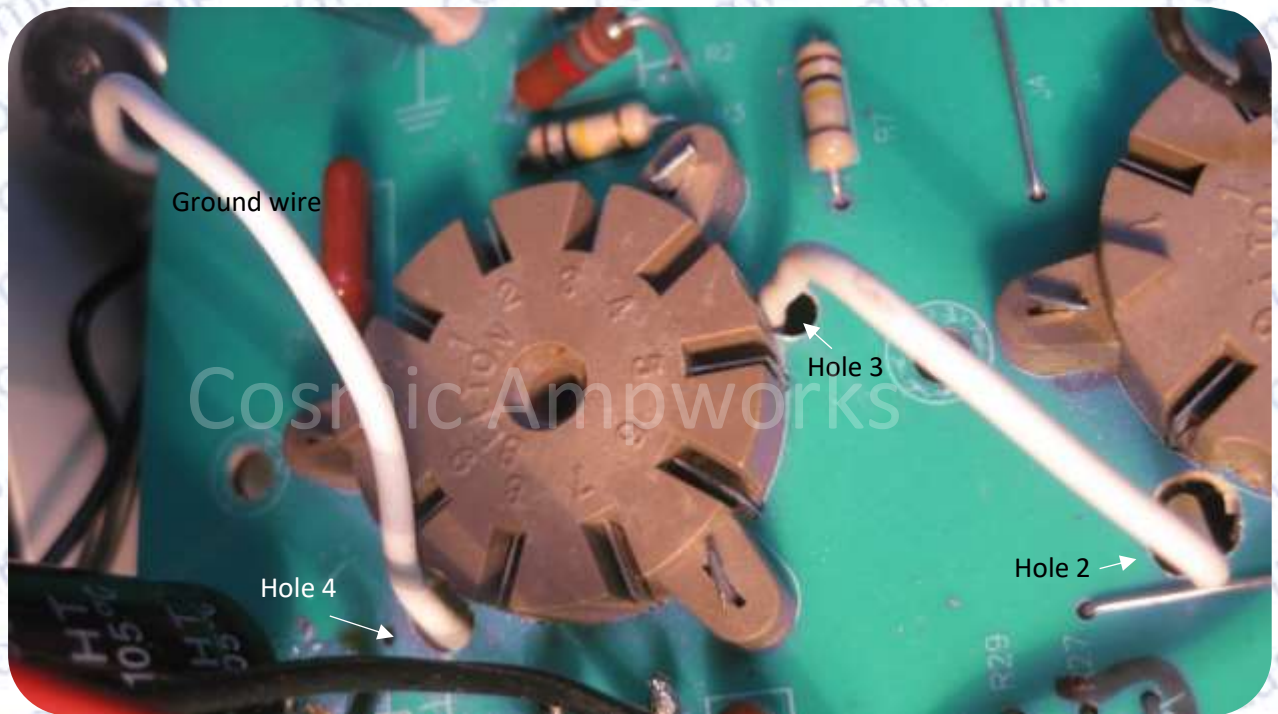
Drill two holes near the first preamp tube: Drill hole 3 right next to the tube socket solder connections of pins 4 and 5; the location is not particularly critical, but make sure not to damage the trace running from pin 6 of the tube (anode) to R7 (load resistor). Drill hole 4 just above the tube socket solder connections of pin 9. Note: don't pay attention to the other components – this picture was also used for the classic HB15 mod kit.
